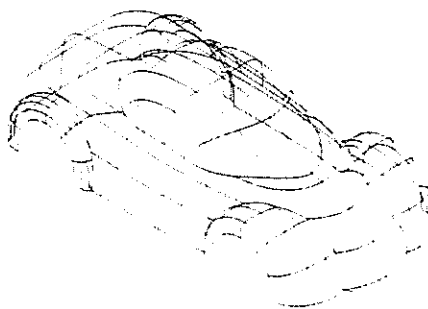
Surface model of the body of a 1/10 scale radio-controlled model car
